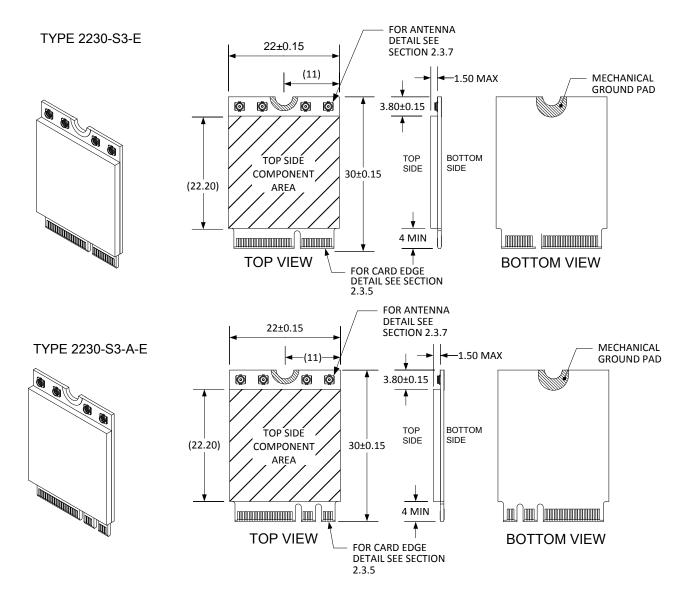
M.2 Type 2230-S3 Mechanical Outline Drawing Examples
